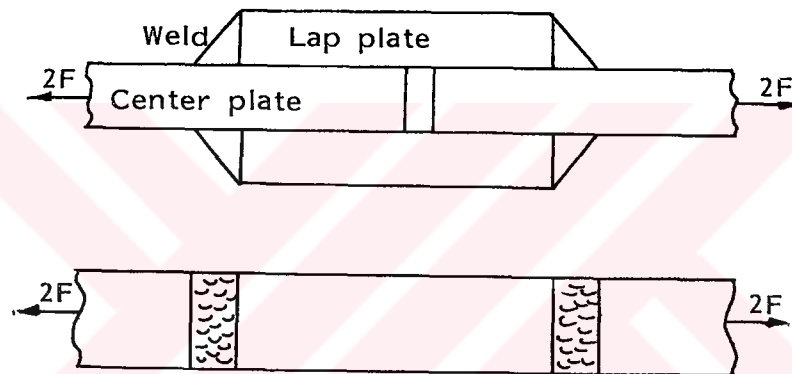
A transverse fillet weld lap joint investigated
